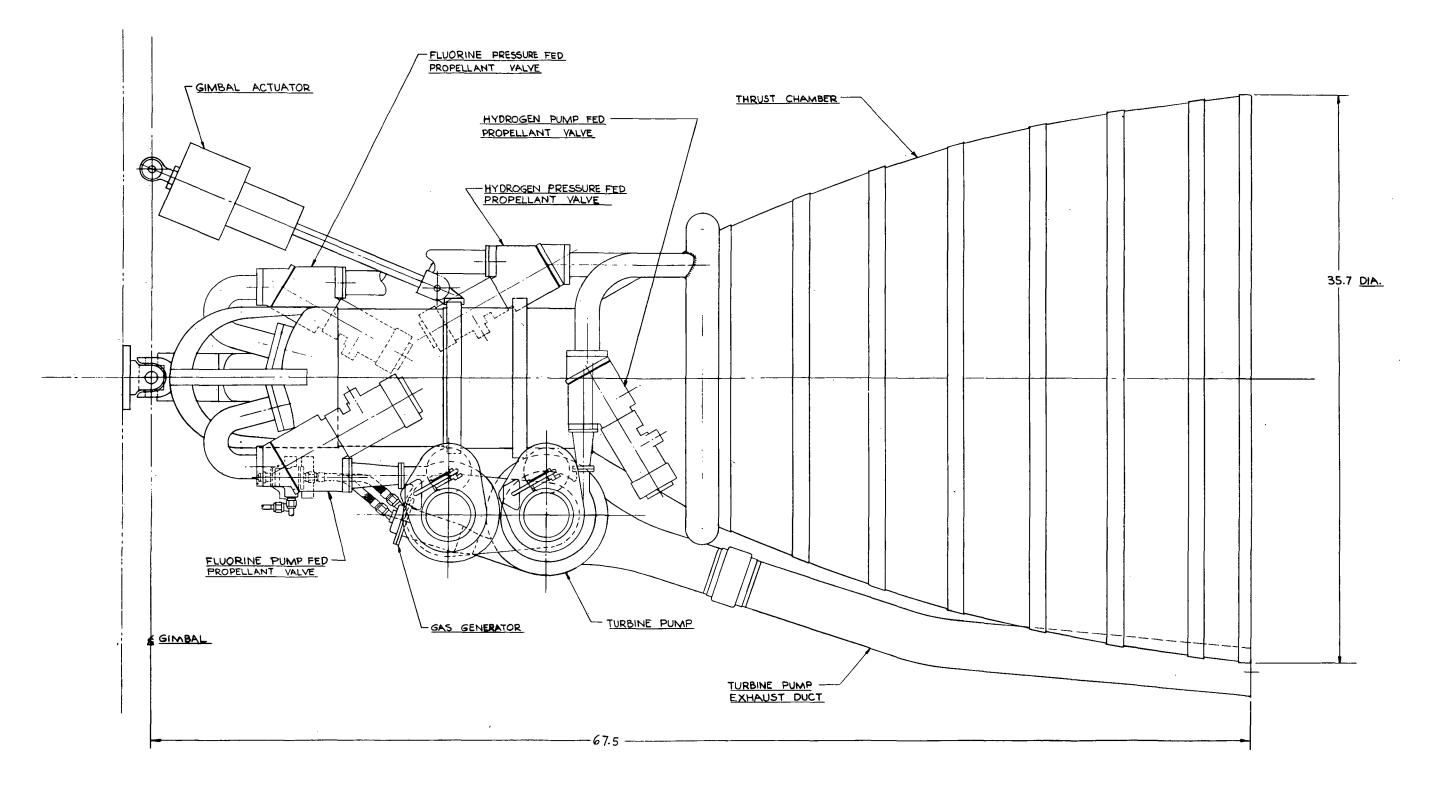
Major Components Installation – Rocket Engine Assembly (Sheet 1 of 2)
